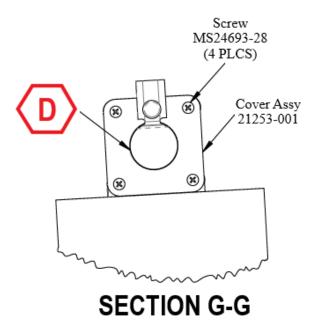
Section G-G Showing Cover Assembly for H80, G10, T34 or T65HG Aircraft
